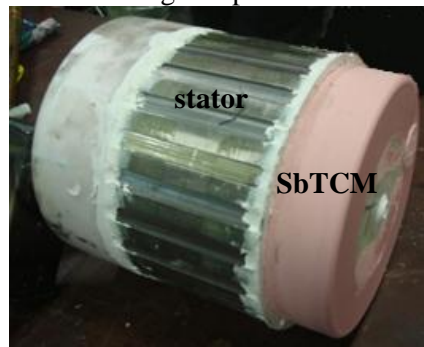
Application example of SbTCM (pink) between winding end part and housing (not shown) in electric machine
